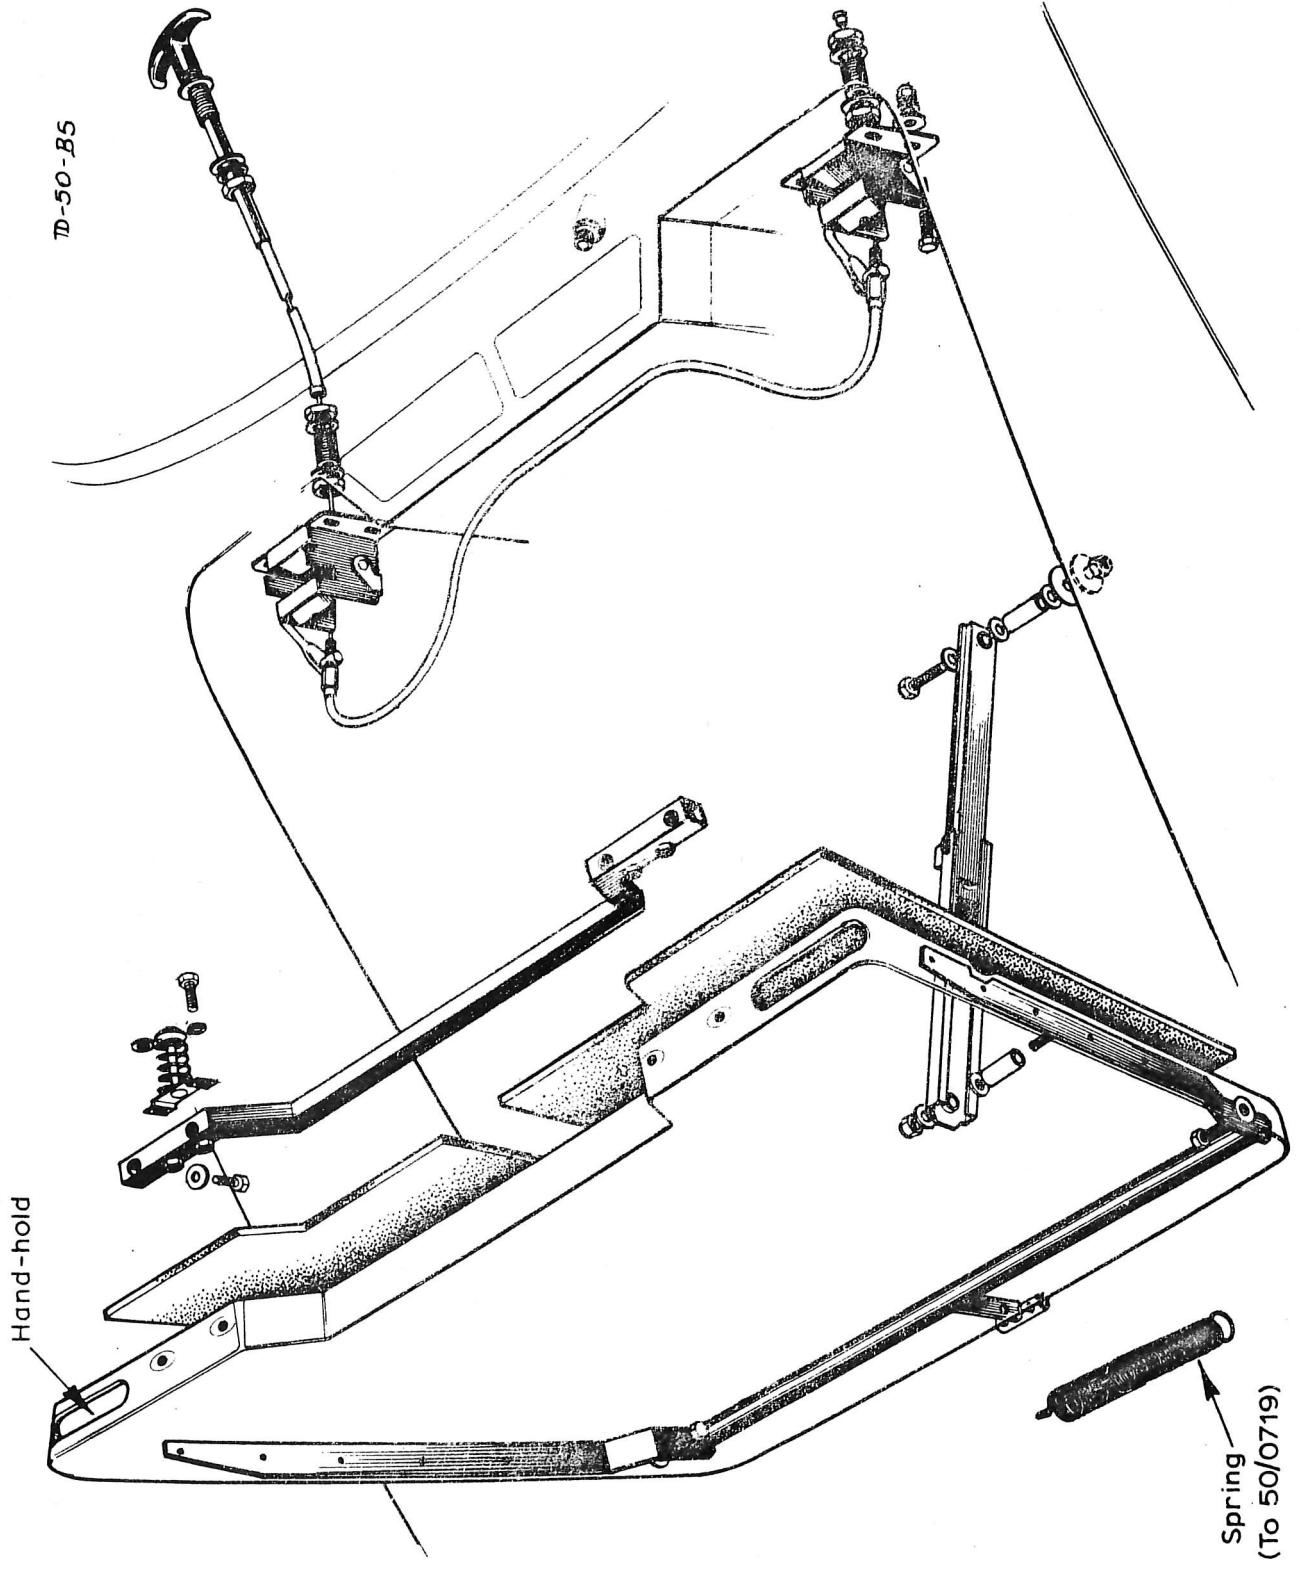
BONNET (HOOD), STAY, & LOCKING MECHANISM.
